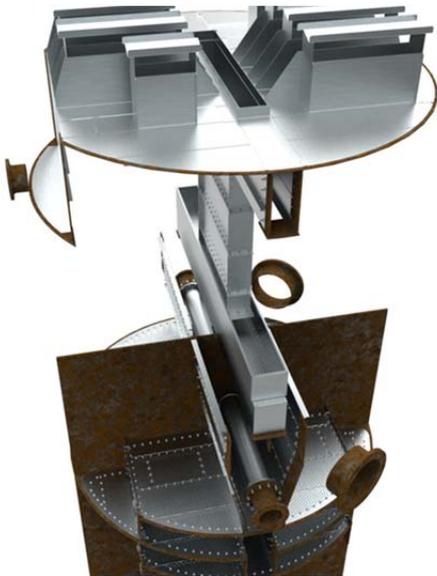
Liquid Splitting Distributor in DWC column; Figure 8b: Dividing Wall Column Trays at Manufacturing Workshop
